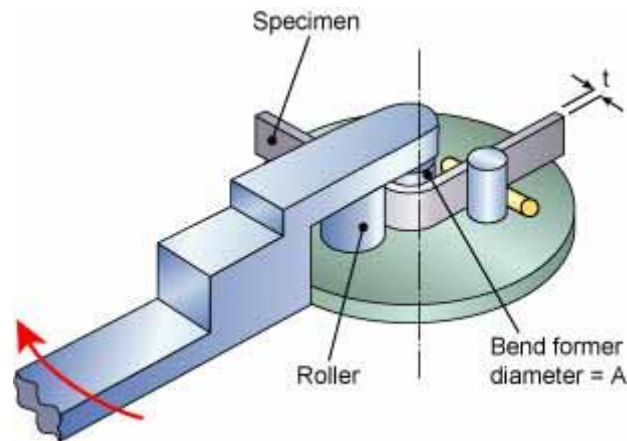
Schematic drawing of a wrap-around guided bend test machine [53]
